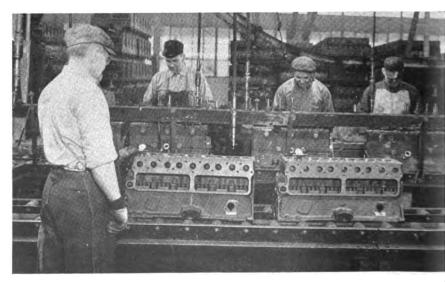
Valve seat grinding operation, showing a part of bank No. 22 (finished blocks) in the background.
